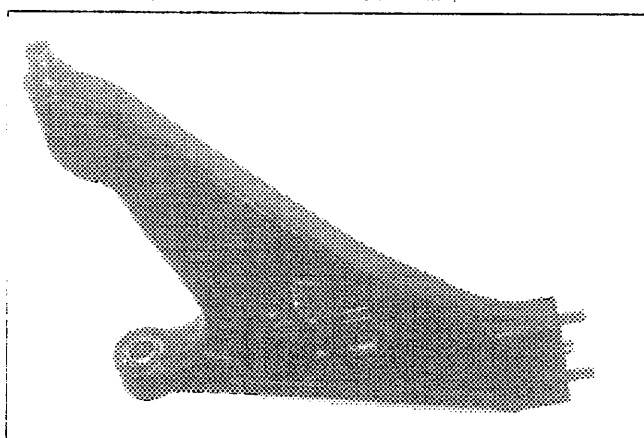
(FRONT REINFORCED LOWER ARM)
